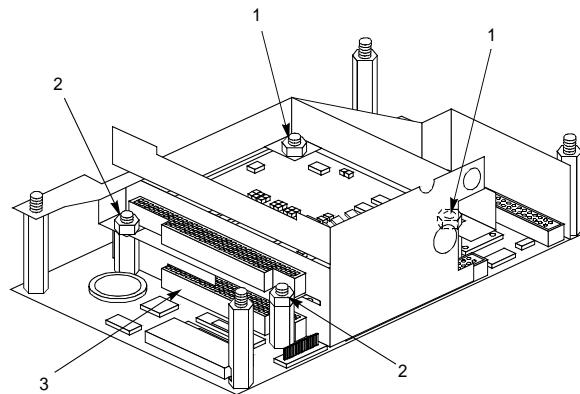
Removal of the DC/DC Converter Circuit Card Assembly
